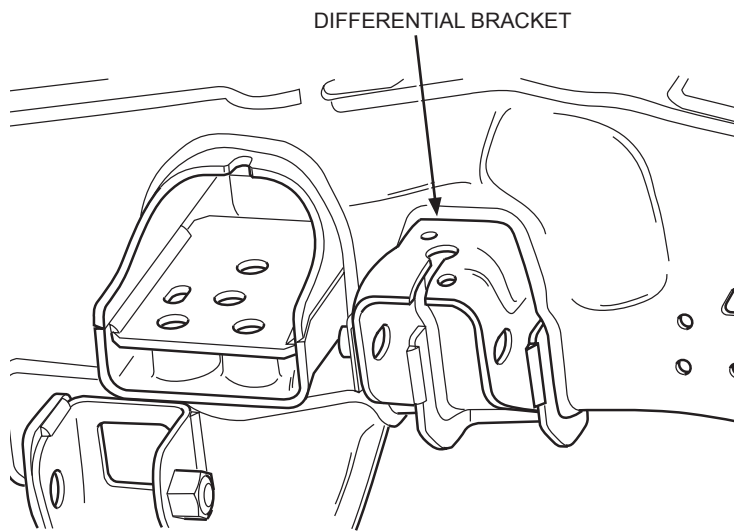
VIEW OF DIFFERENTIAL BRACKET WITH AXLE REMOVED.
